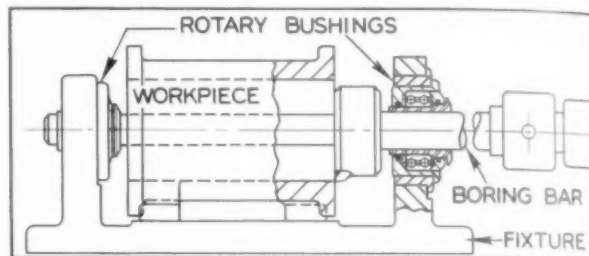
A boring fixture, for use with a horizontal spindle machine, incorporating rotary pilot bushings. For purpose of easier comparison with the plain bushing shown in Fig. 16, the workpiece and general setup are practically identical. The rotary bushings permit a close fit on the bar and, as there is little if any heat generated because of friction between the bar and the bushing, to cause expansion of the bar, fit between the two remains practically constant and assures more accurate boring over sustained intervals of time.
